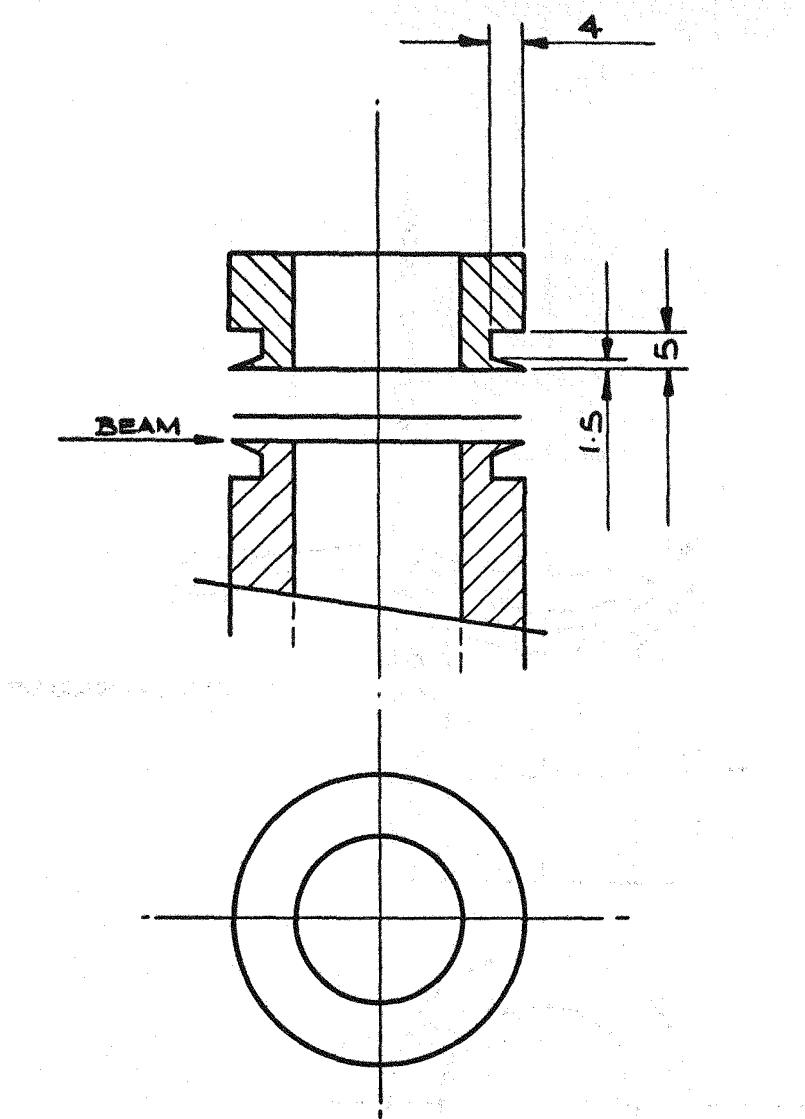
EDGE WELD WITH HORIZONTAL BEAM
